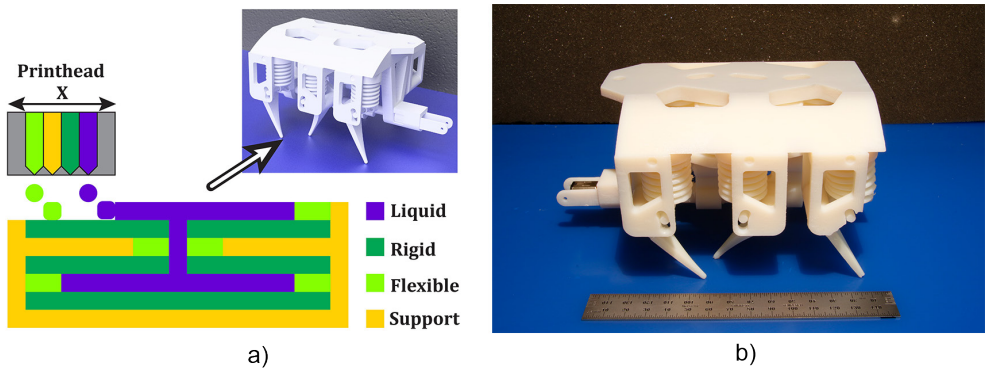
Non-assembly 3D printed hydraulic walking robot by MacCurdy et al. [82]. a) Showing the different materials and order in which the bellows were printed. b) The final prototype.
